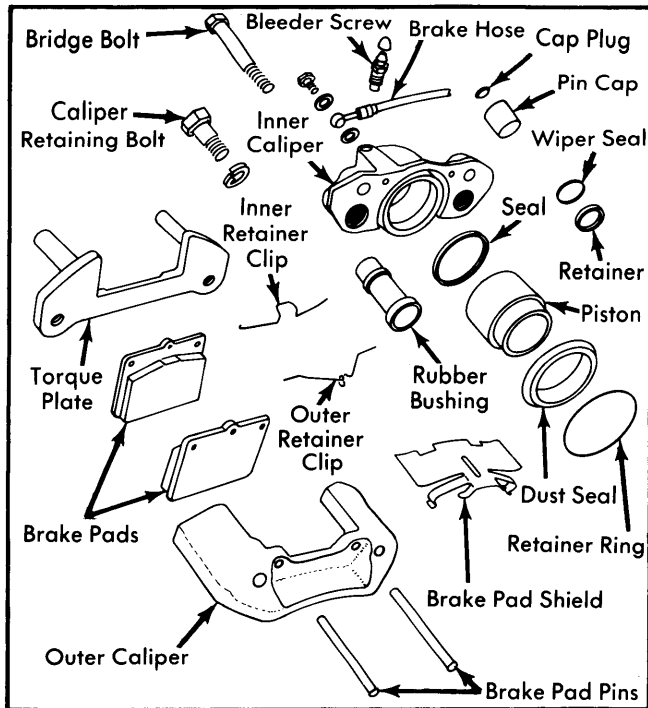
Exploded View of CVCC Station Wagon Caliper Assembly
